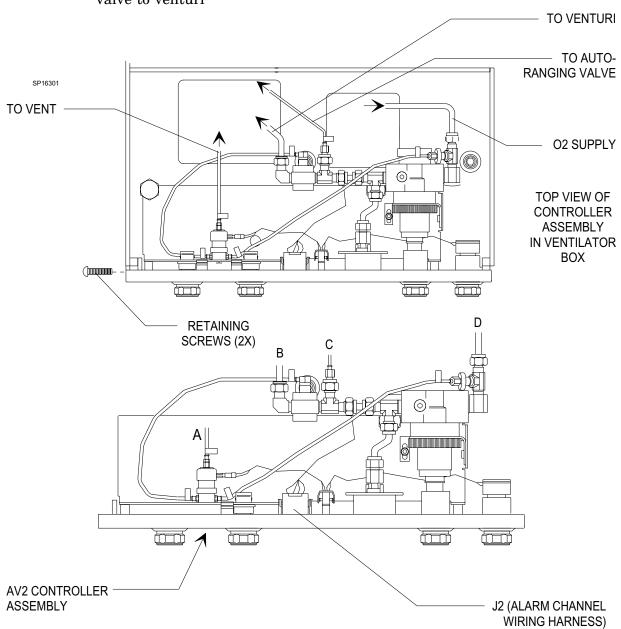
AV2 VENTILATOR CONTROLLER ASSEMBLY REMOVAL
